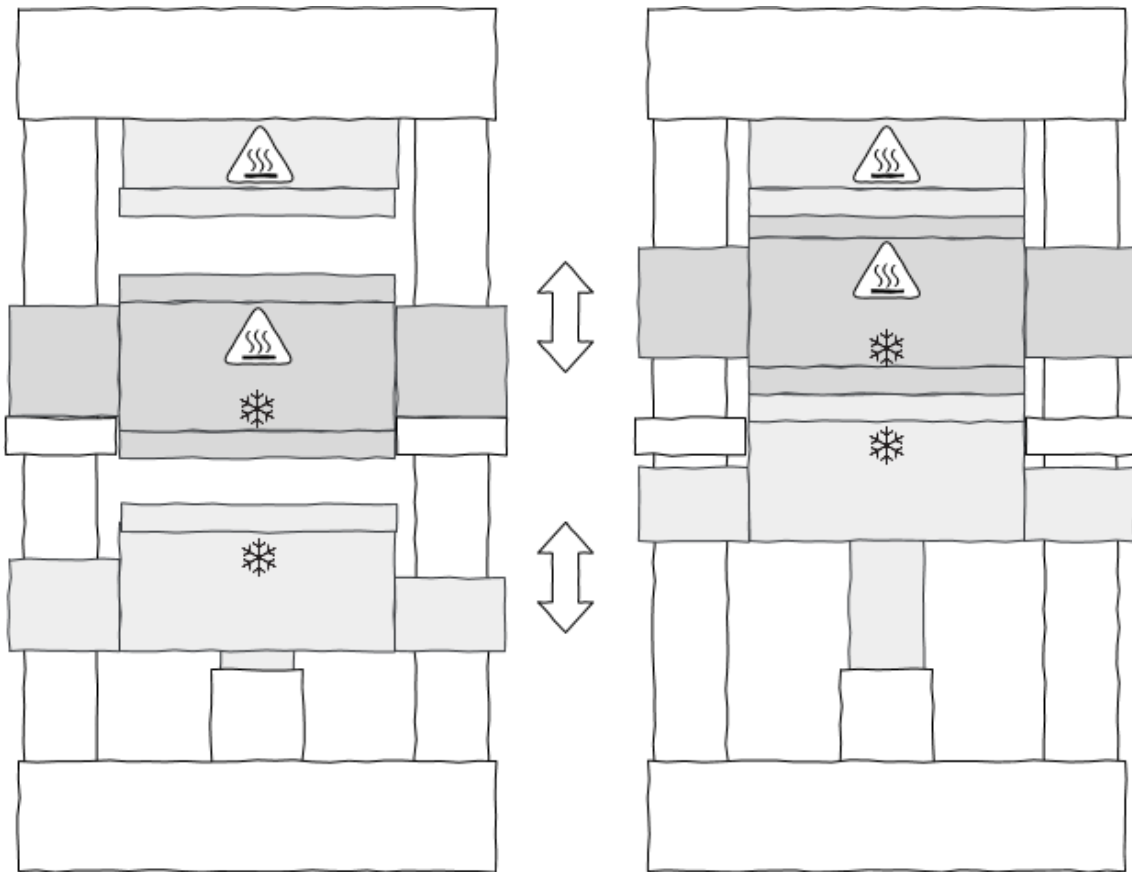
Heated and cooled hydraulic press drawing to supplement description. [Author]
